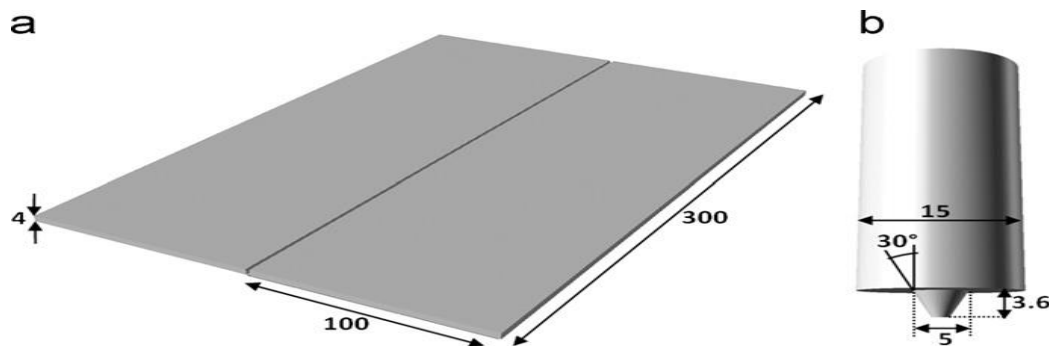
Sketch of the used (a) joint and (b) tool geometries
